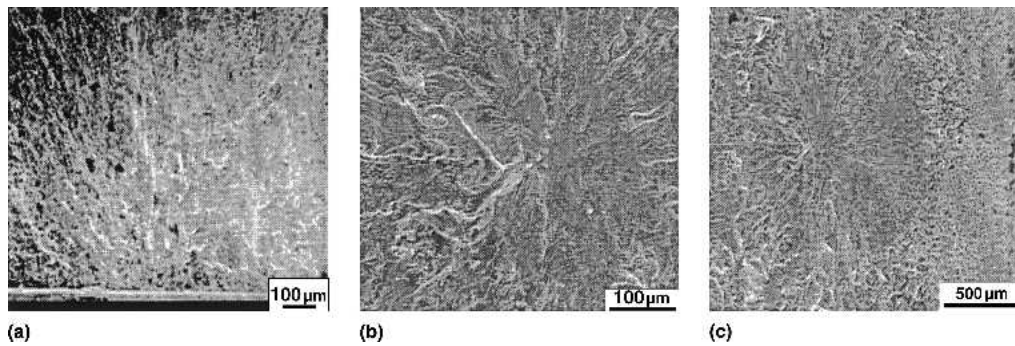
Fractographs of fatigue fracture surfaces: (a) specimen type I, (b) specimen type IV, and (c) specimen type V
